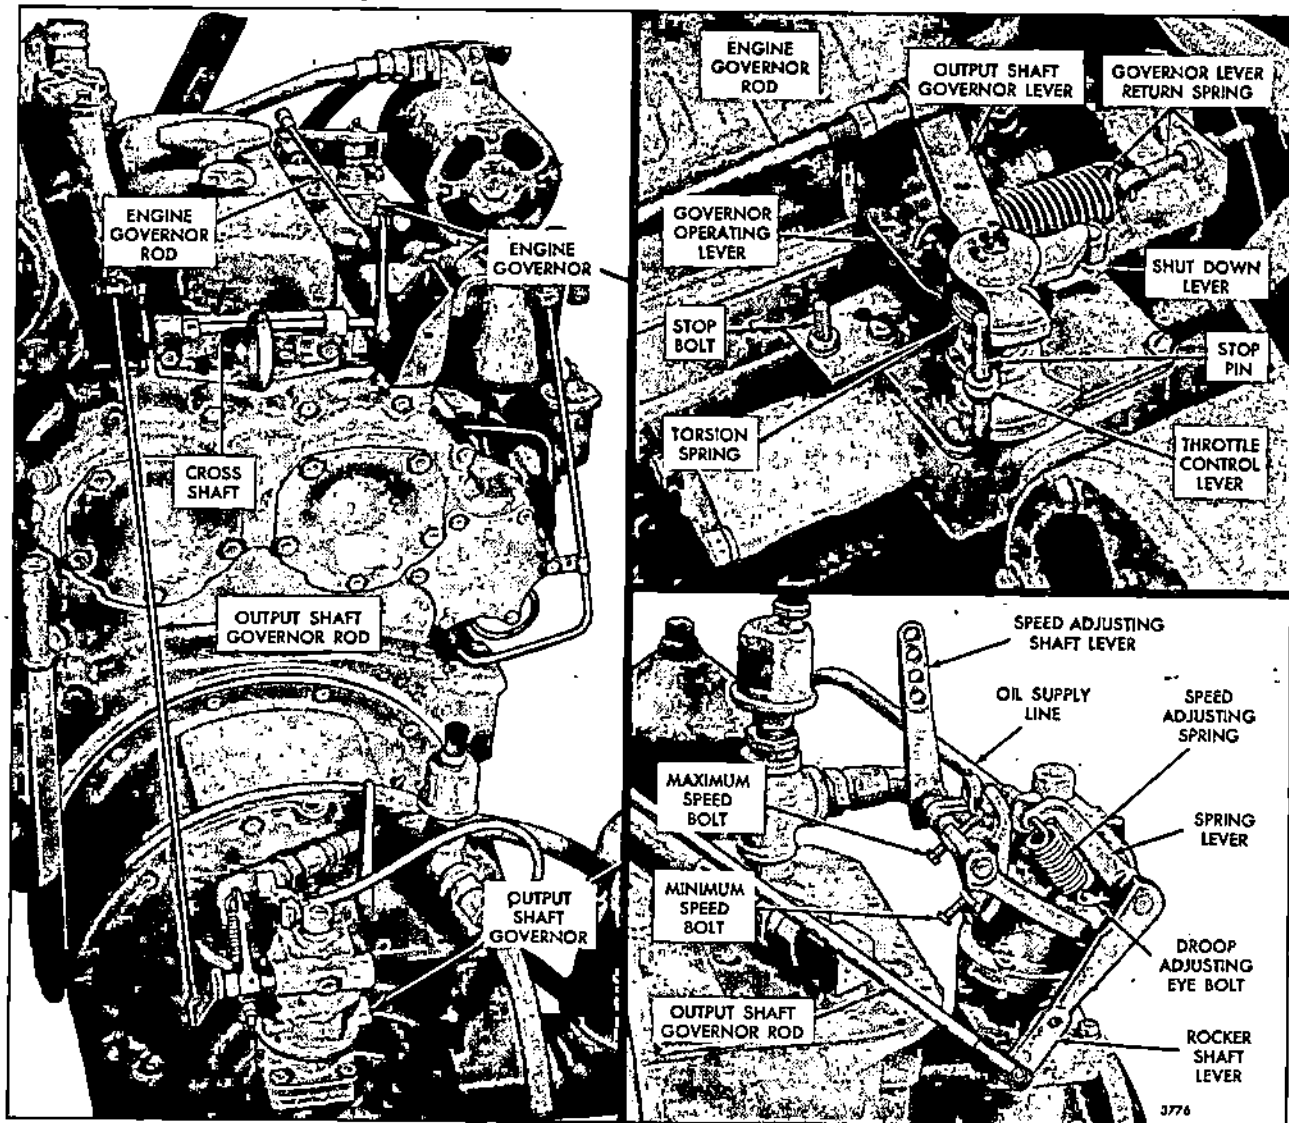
Gear Driven Output Shaft Governor and Linkage
